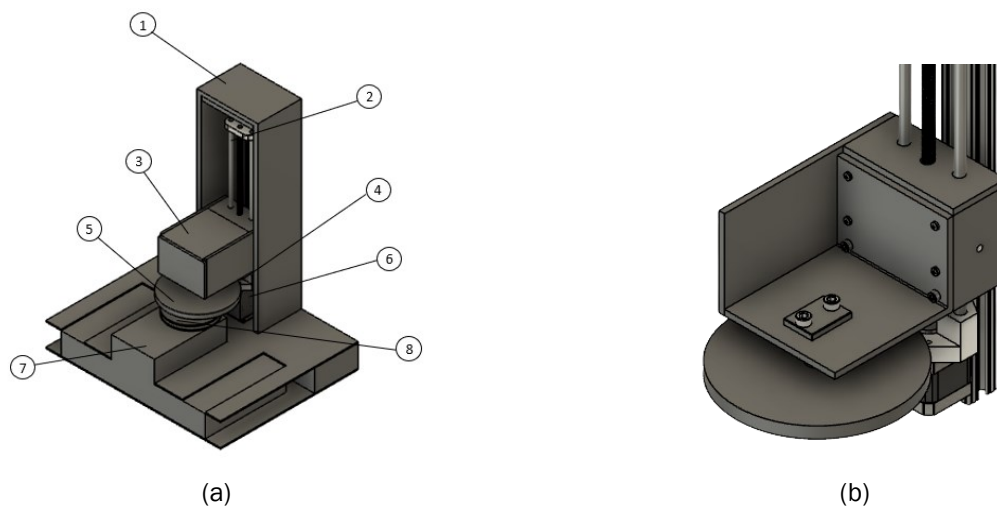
The final model of the texture analyzer prototype (a) Isometric view (b) Inside look of part number 3 (box connector)
